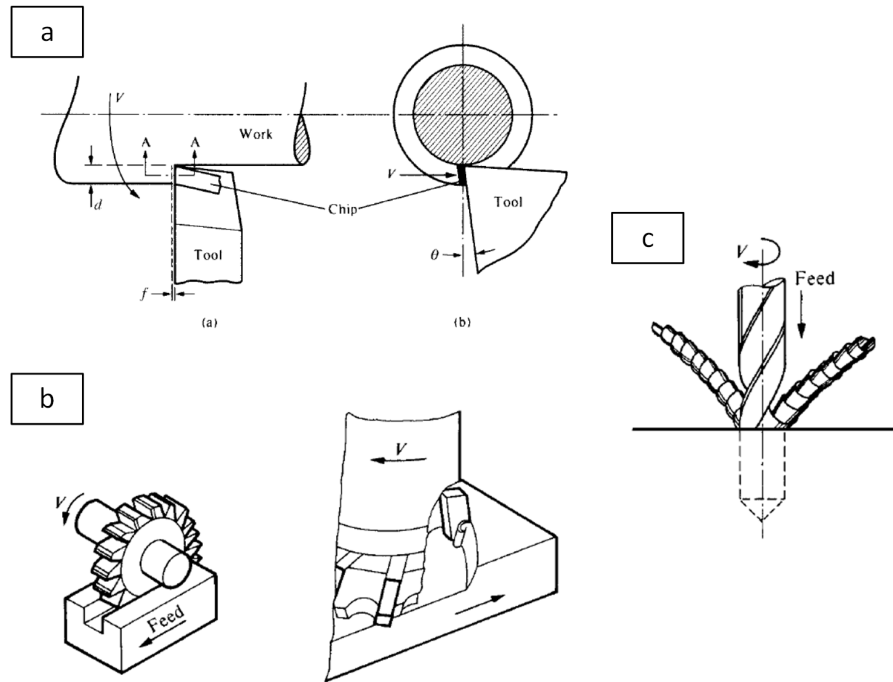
Three most widely used cutting process: (a) turning, (b) milling , and (c) drilling [6].
